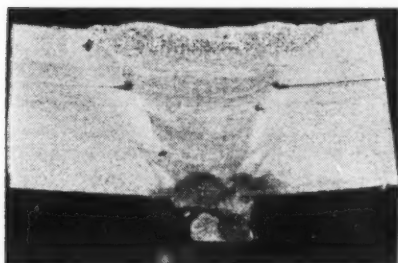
Weld made from one side only on steel containing layer of gas-forming impurities
